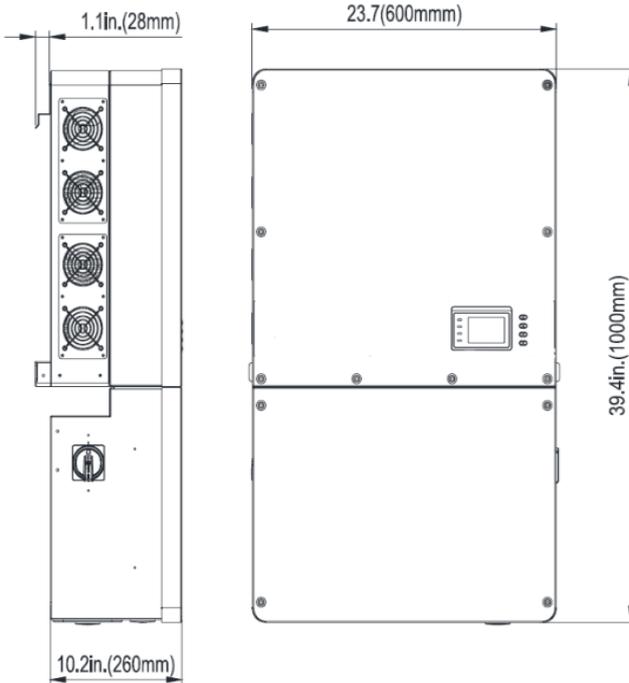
PVI 50/60TL Inverter Dimensions
